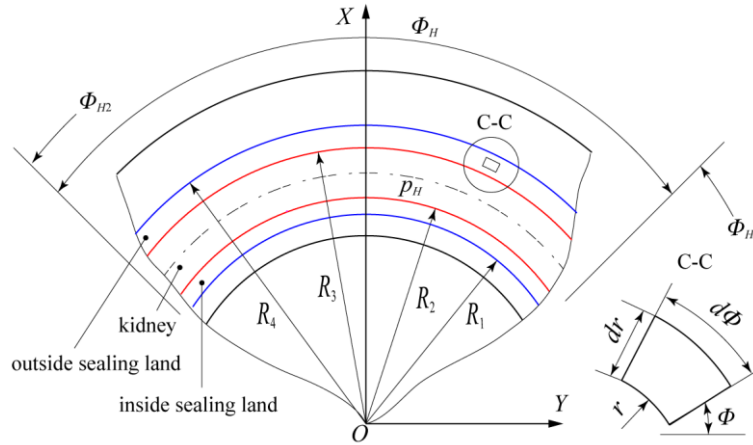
Main geometric dimensions of the cylinder block/valve plate interface
